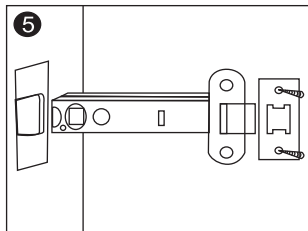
Insert the latch into the prepared morticed hole and mark around the faceplate. Remove the latch and chisel out a recess to accept fixed forend ensuring that when fitted the faceplate is flush with the door edge.
